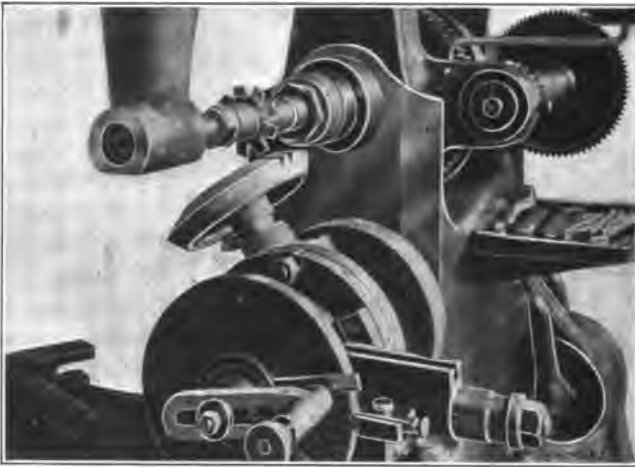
Milling Machine Set up for Cutting a Bevel Gear
